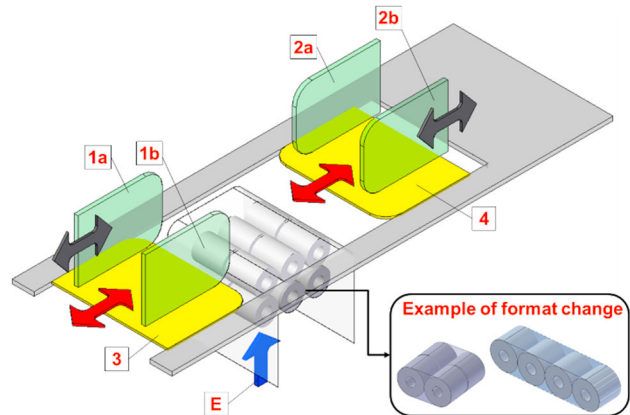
Schematic of a flexible machine for paper roll wrapping-
